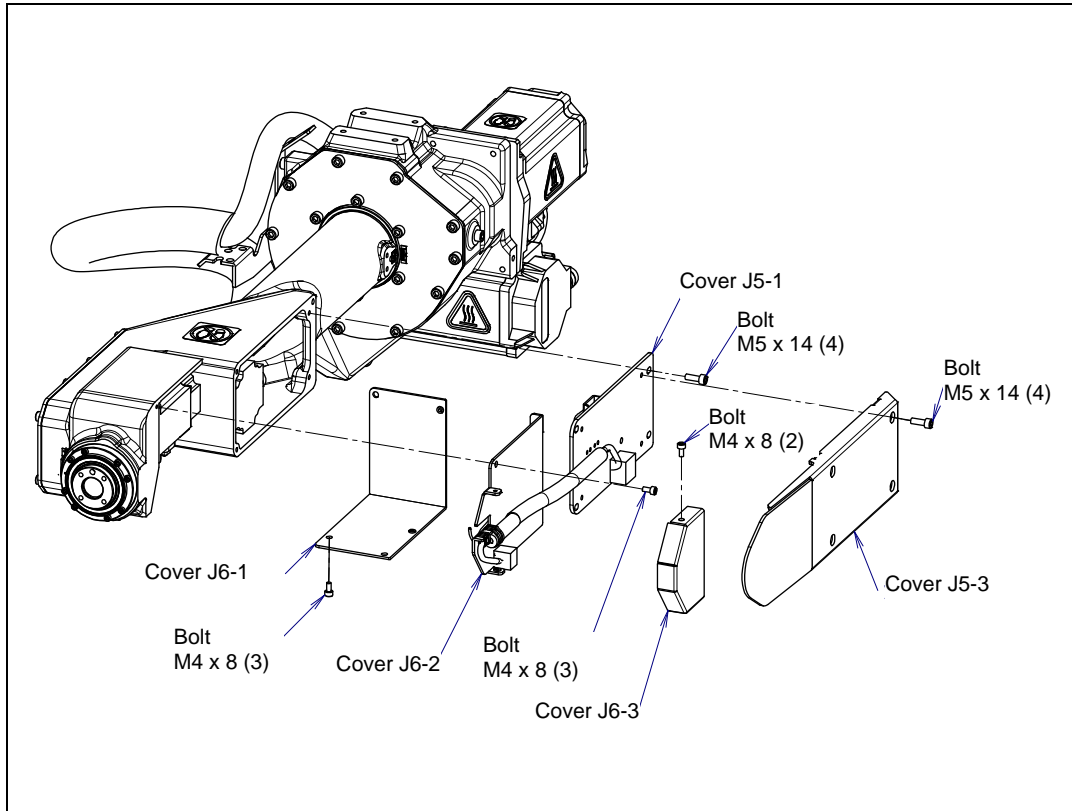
(a) Replacing the cable kit (J5/J6-axis motor part 1)
